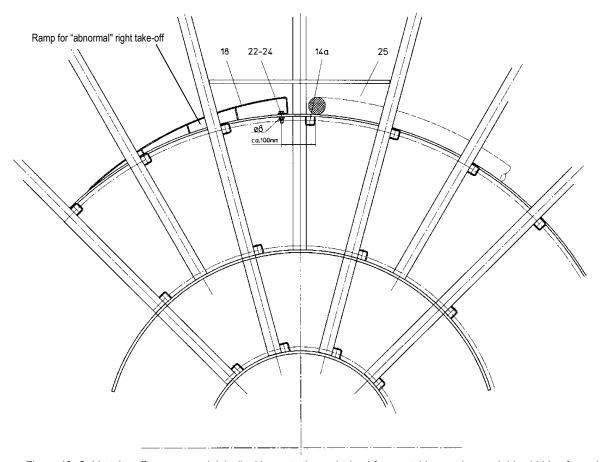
Cable take-off uncommon / right (looking onto the reel wheel from outside, gearbox and drive hidden from view).
